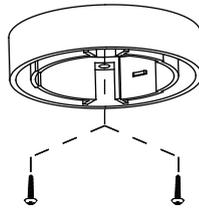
Remove outer cowl from fitting, Fix cowl to surface with screw through mounting tab
